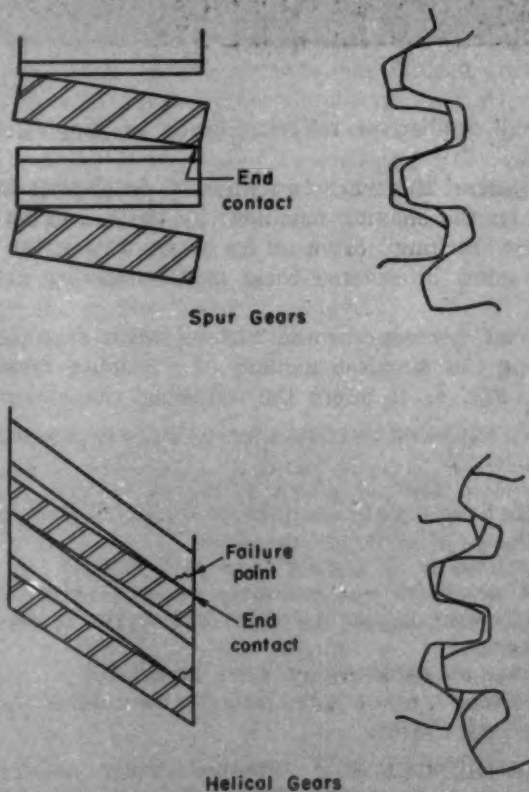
Slight misalignments between mating gears can cause their teeth to contact at the ends. This condition is particularly to be avoided in helical gears because the thin, acute-angle tooth ends are incipient failure points
